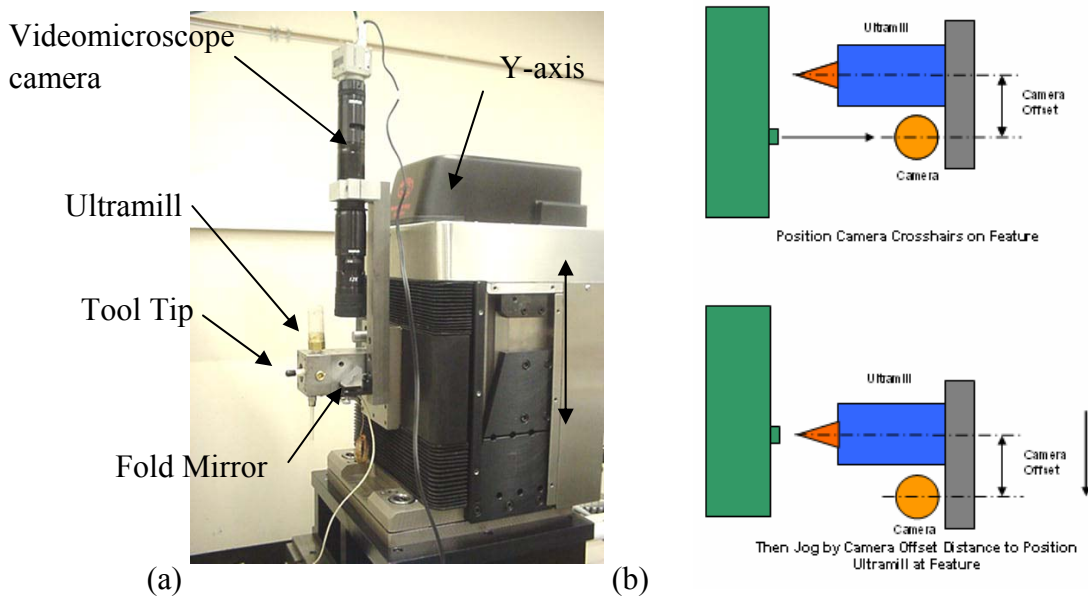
(a) Nanoform Y-axis with video microscope camera for plan view of workpiece. (b) Top view of Ultramill showing microscope alignment of tool to part.
